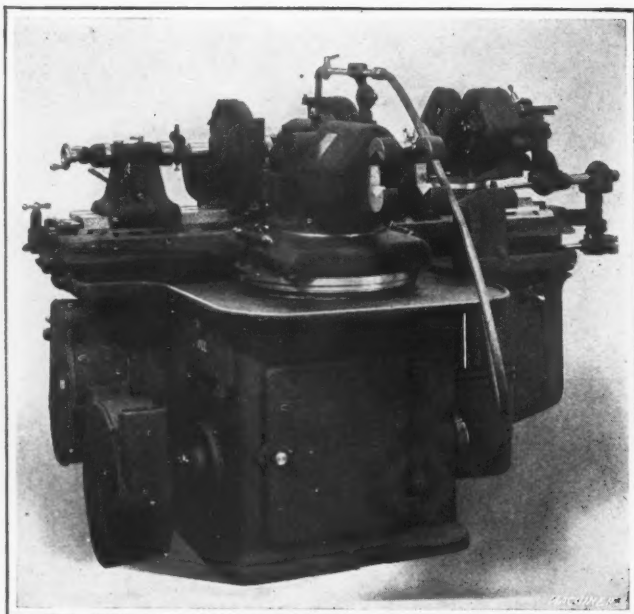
Rear View of Norton Universal Grinding Machine, showing Arrangement for Single-pulley Drive
